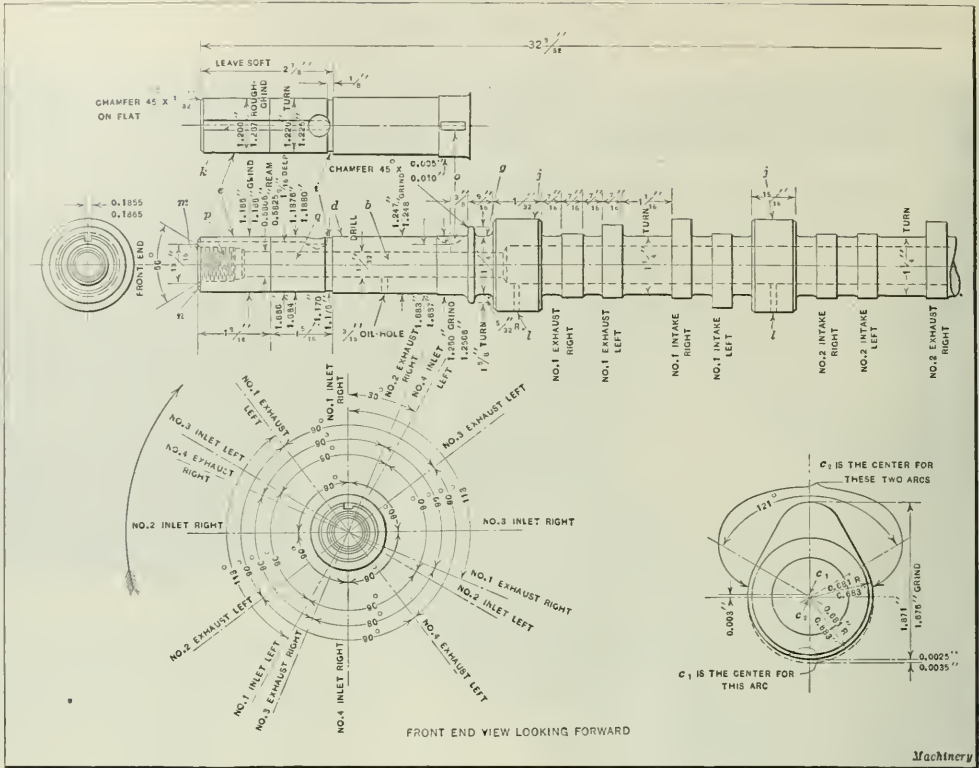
Detailed View of Camshaft for Automobile Engines made by the Lincoln Motor Co. In Connection with this Illustration Reference
